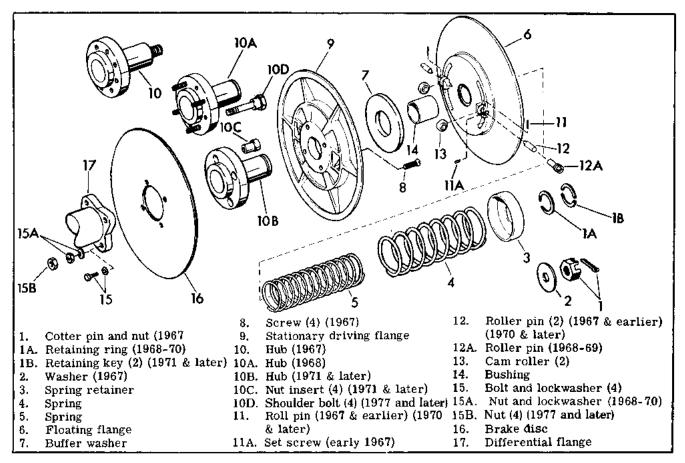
B-50. Transmission Rear Drive - Exploded View (1967 & Later D) (1969-1972 DC)
